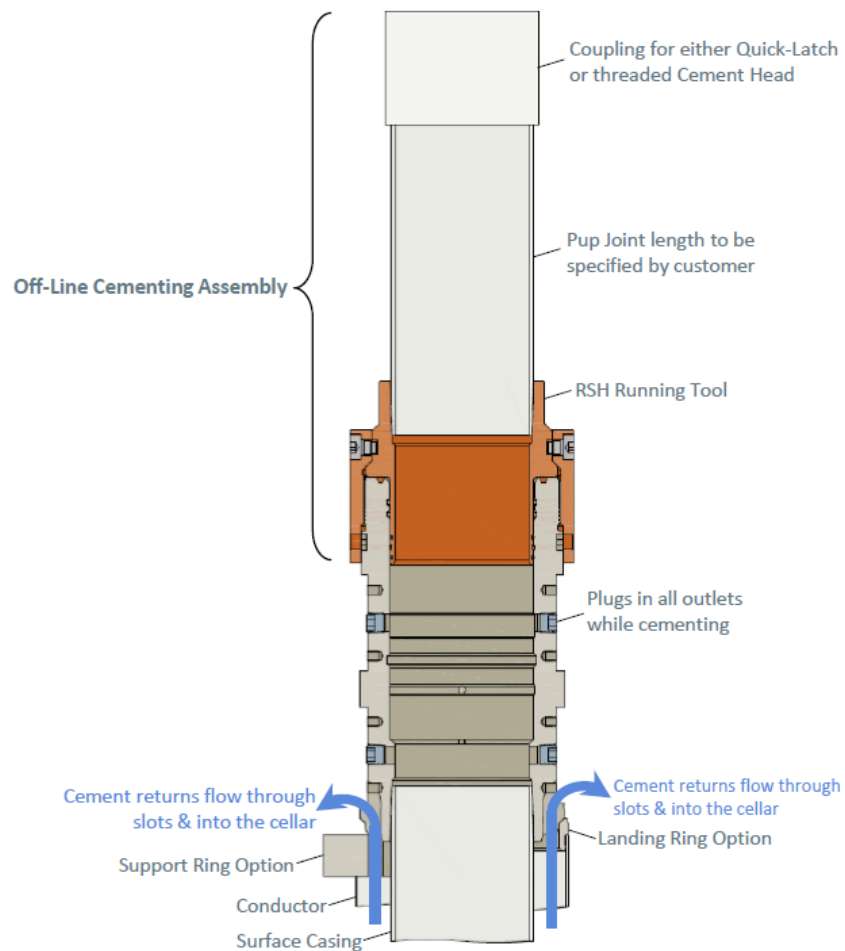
Vault 13 3/8" 5M offline cementing tool. Pressure rating limited by the lesser of 5M tool rating or the 13 3/8" pup joint and casing.
